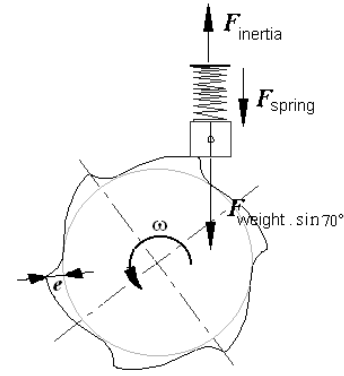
Kinematic configuration of the cam-follower mechanism.
